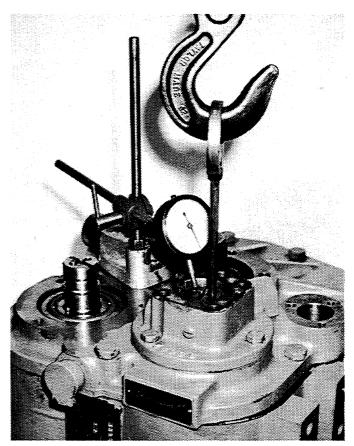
Applying Pulling Force While Checking Reverse Clutch Shaft End Play.
